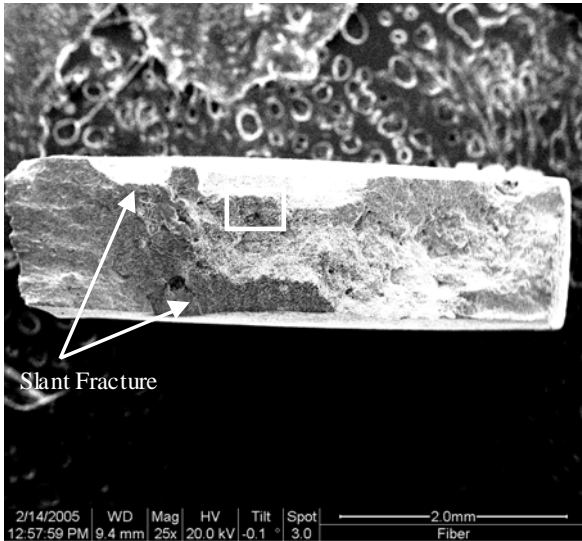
Specimen F/G-001, fracture surface from tensile test
